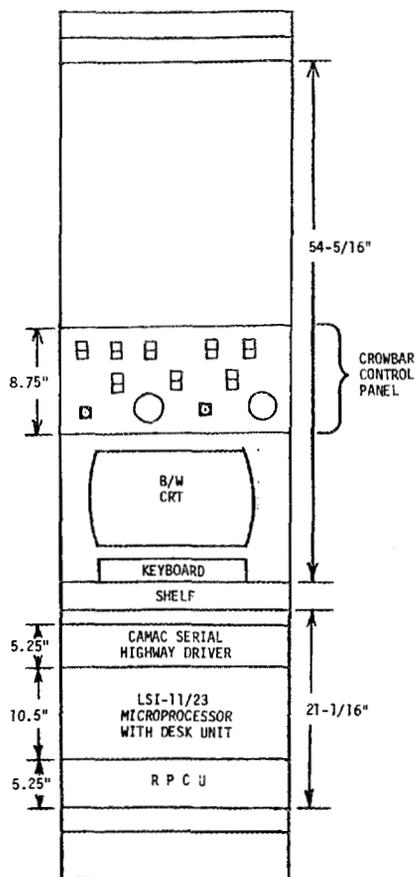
28 GHz EBT-P CABINET CONFIGURATION AND PANEL LAYOUT – SECTION 3
